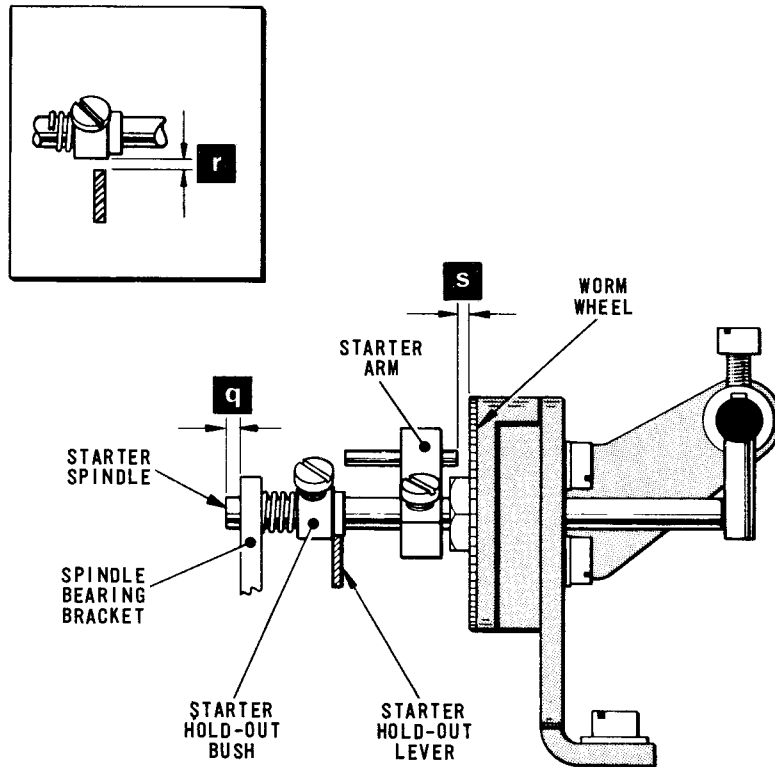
STARTER SWITCH-STARTER PIN/WORM WHEEL MECHANISM
